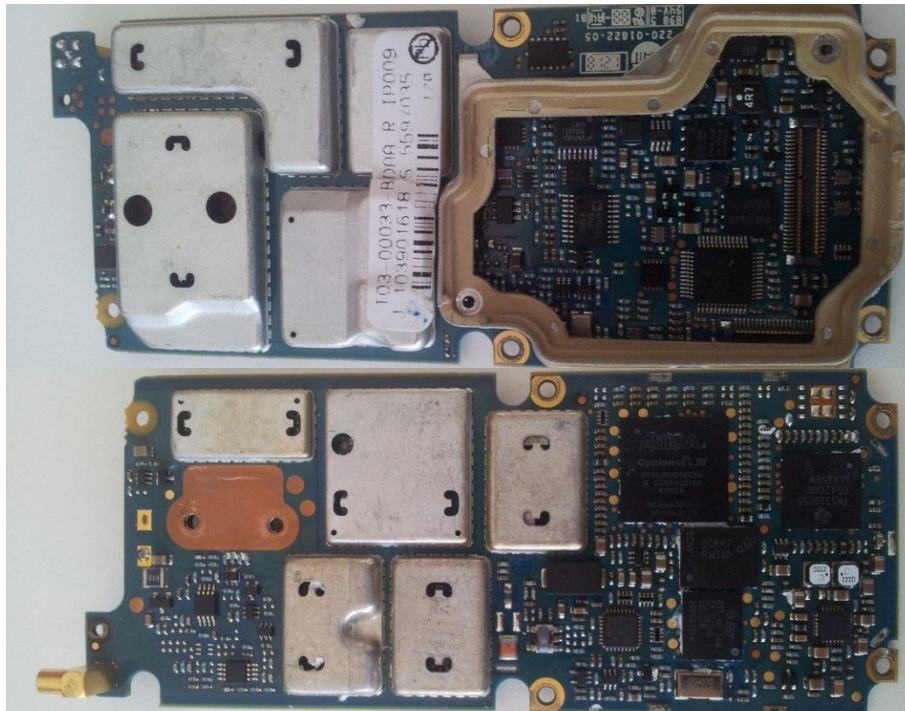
RF Board, Top – Front Face, Bottom – Rear Face
